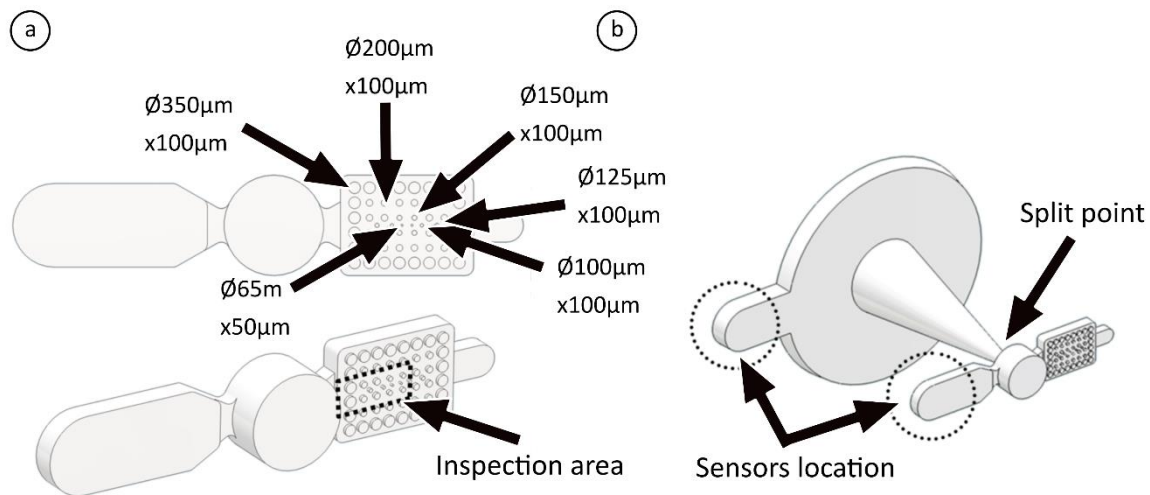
CAD images of the designed part and arrangement and dimensions of the micro pillars (a). CAD image of injected part and the runner system (b).
